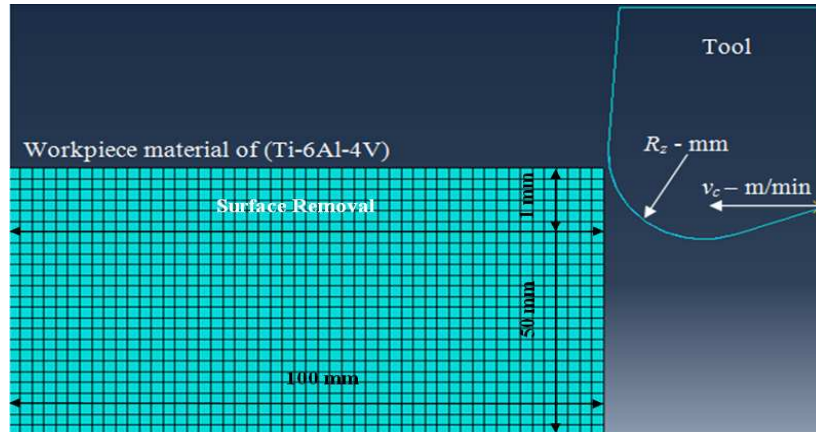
Meshing elements and assembly parts along the boundary of the work-piece and tool.
